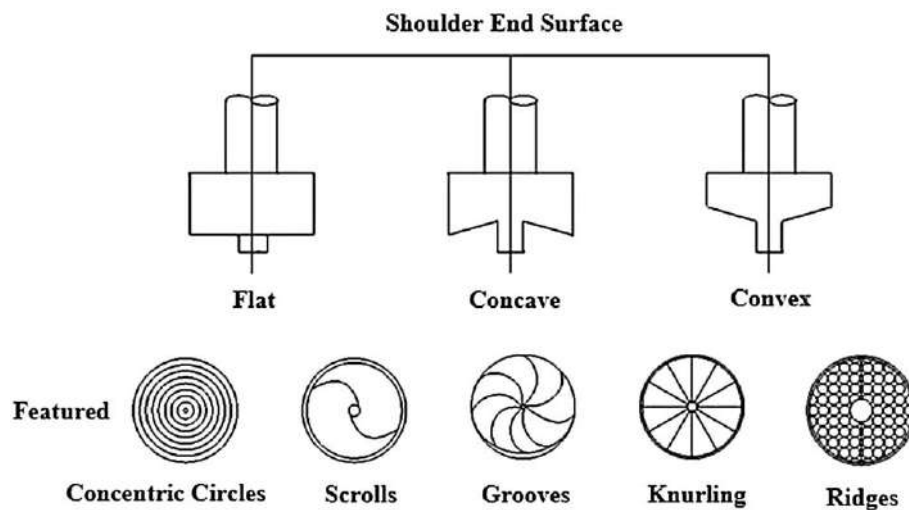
Geometries of tool shoulder, which makes contact with workpiece surface, (Courtesy: (Mahakur et al. 2021))
